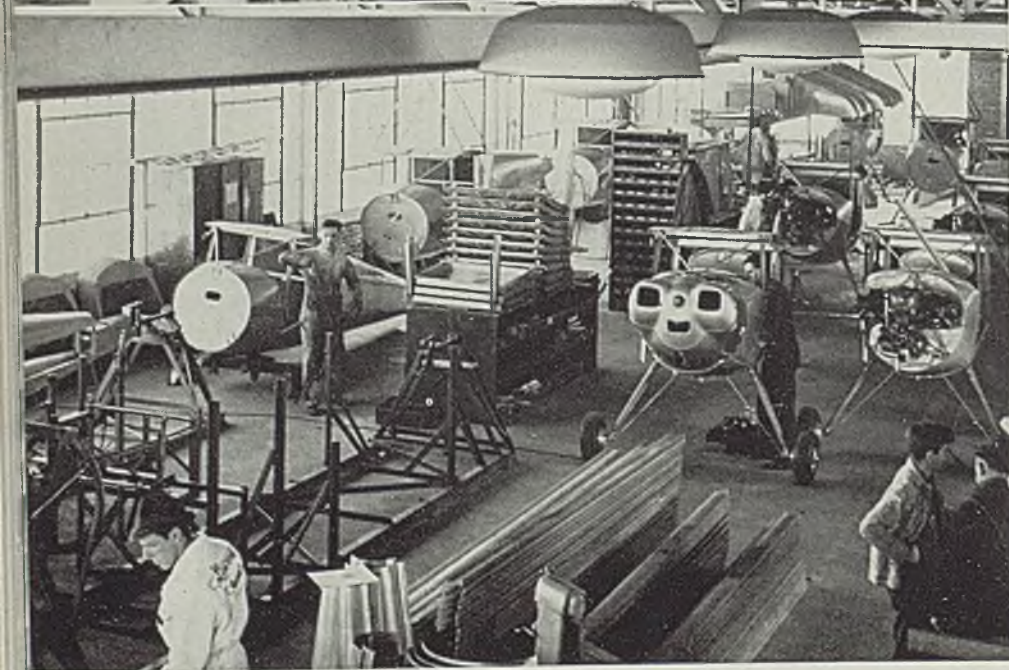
General view of assembly line, below, showing fuselage in process of construction at left. Planes in return line at right have been equipped with engines and are almost ready for transfer to adjoining floor where wings are installed
